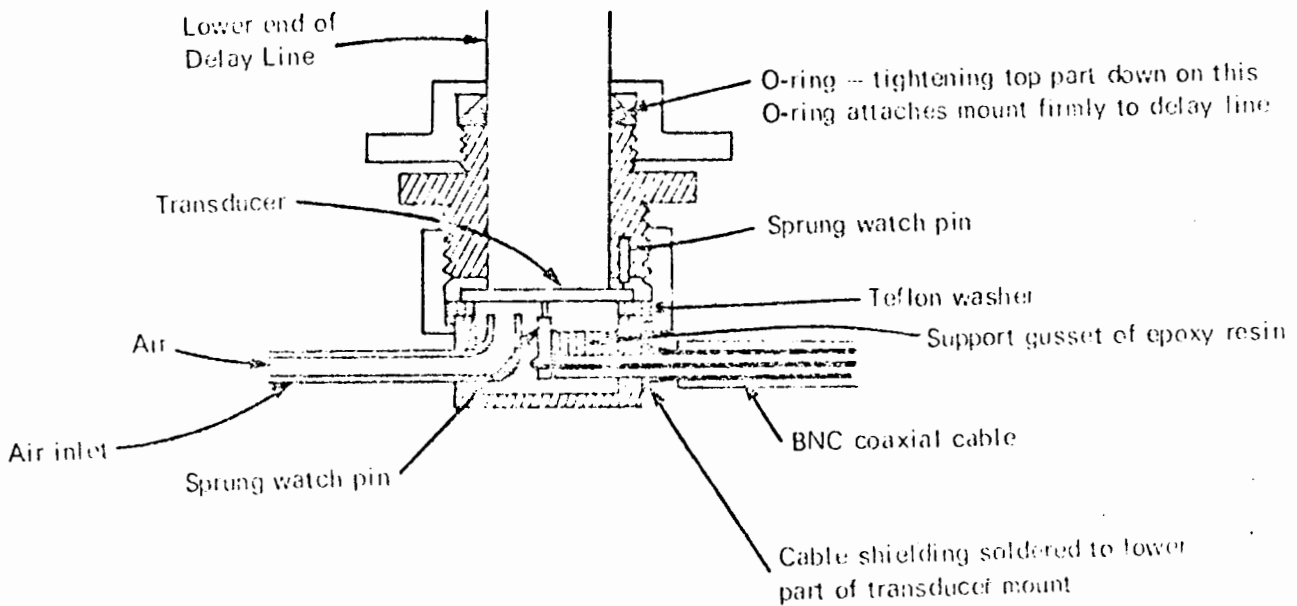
Transducer Mount #2 in cross-section. Air outlet omitted for clarity.
